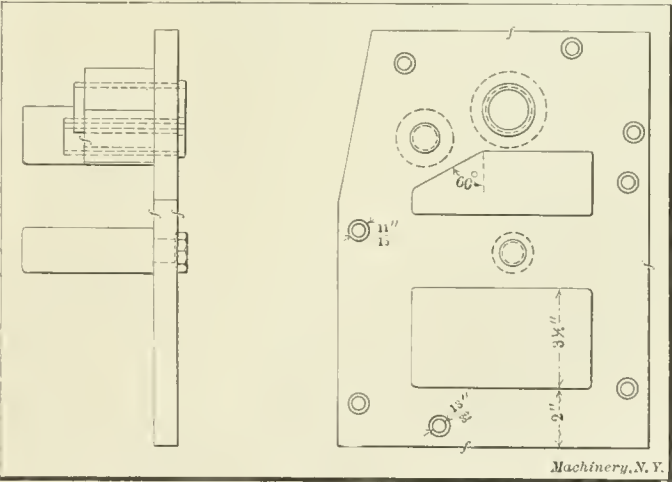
Details of Jig shown standing on Edge in Fig. 22. Note Principle of Locating
